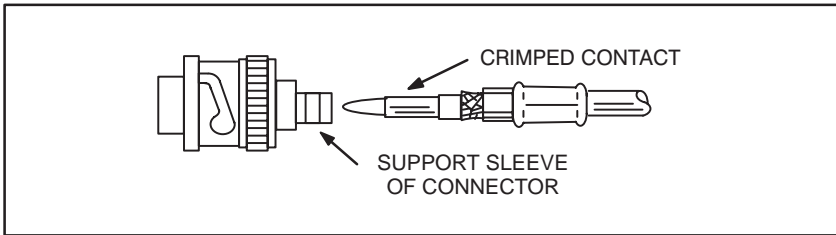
Connector Installation Step 6 for RG-59/U Cable
